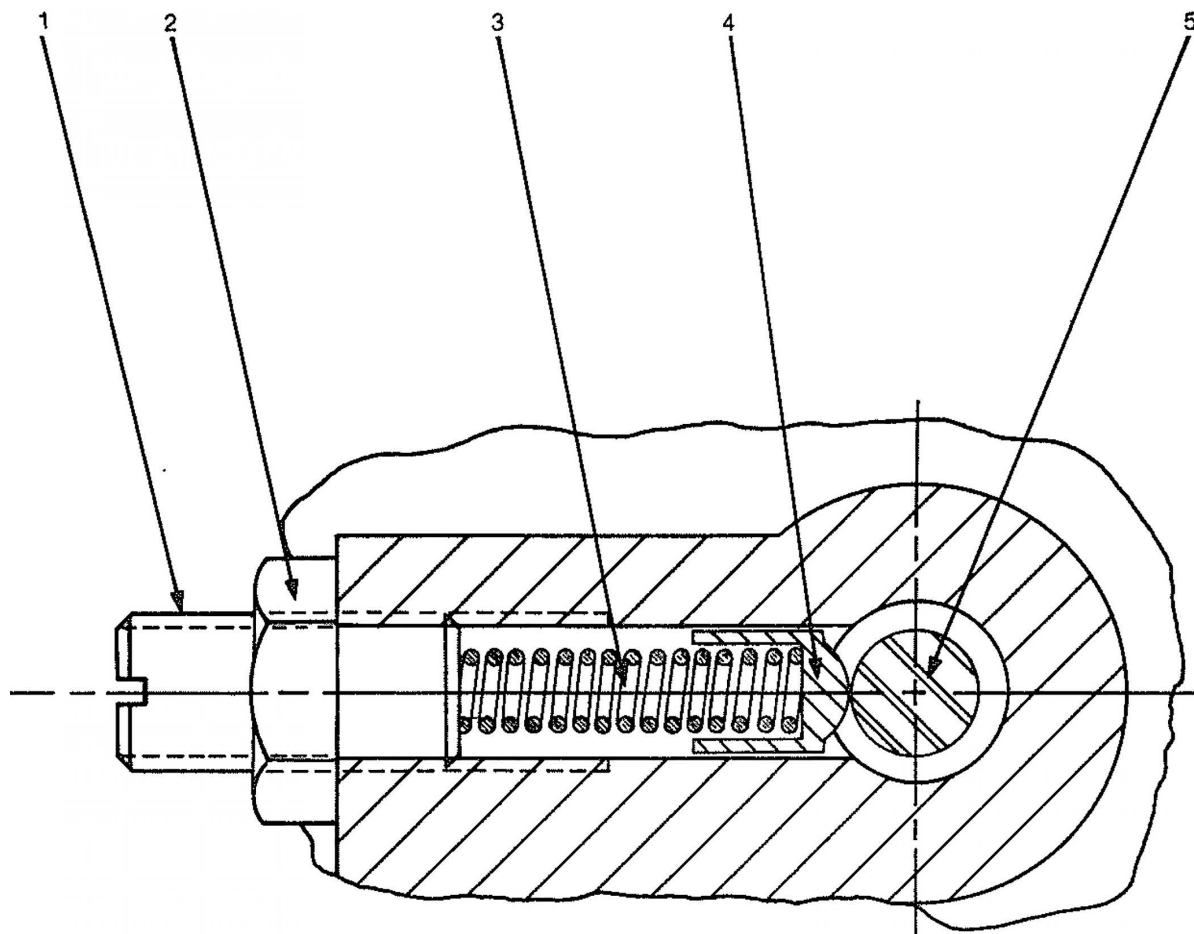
GENERAL ASSEMBLY PARTS DRAWING
